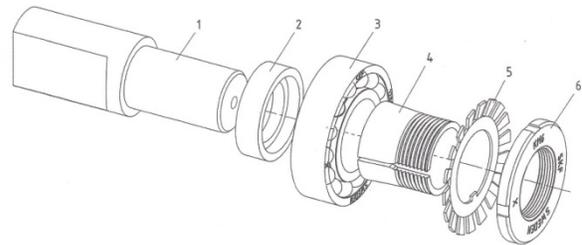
The exploded view of the training kit on mounting and dismounting of ball bearing onto and from shaft using adapter sleeve (part no.4)
